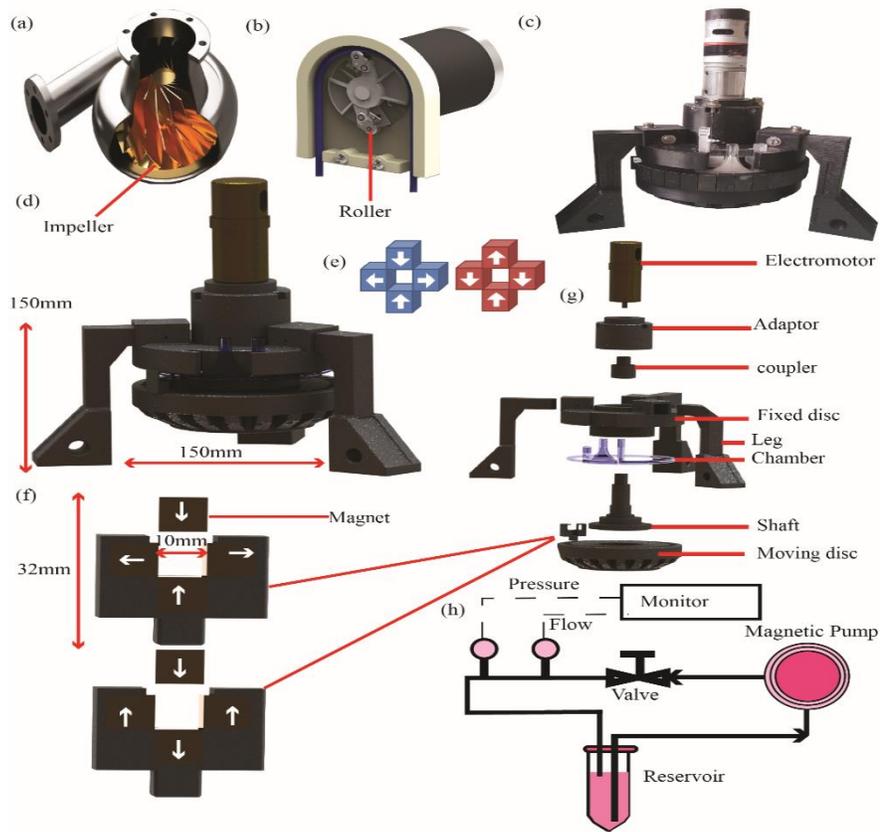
a) type of centrifugal pump used in the circulation. b) A kind of roller pump. c) Assembled magnetic pump after printing. d) Prototype of the designed pump. e) Two arrangements of magnets designed to create a pinching point as well as the space between them to pass the channel. f) Design of a magnet holder that shows how to place the three magnets g) a collapse view of the pump showing the main internal components. h) Experimental setup
